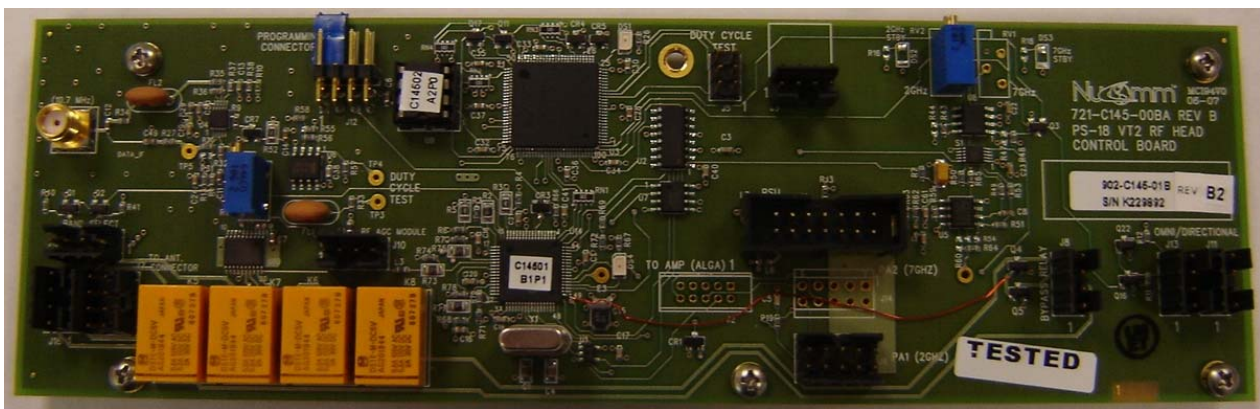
RF HEAD CTRL PCBA 902-C145-01B Top
